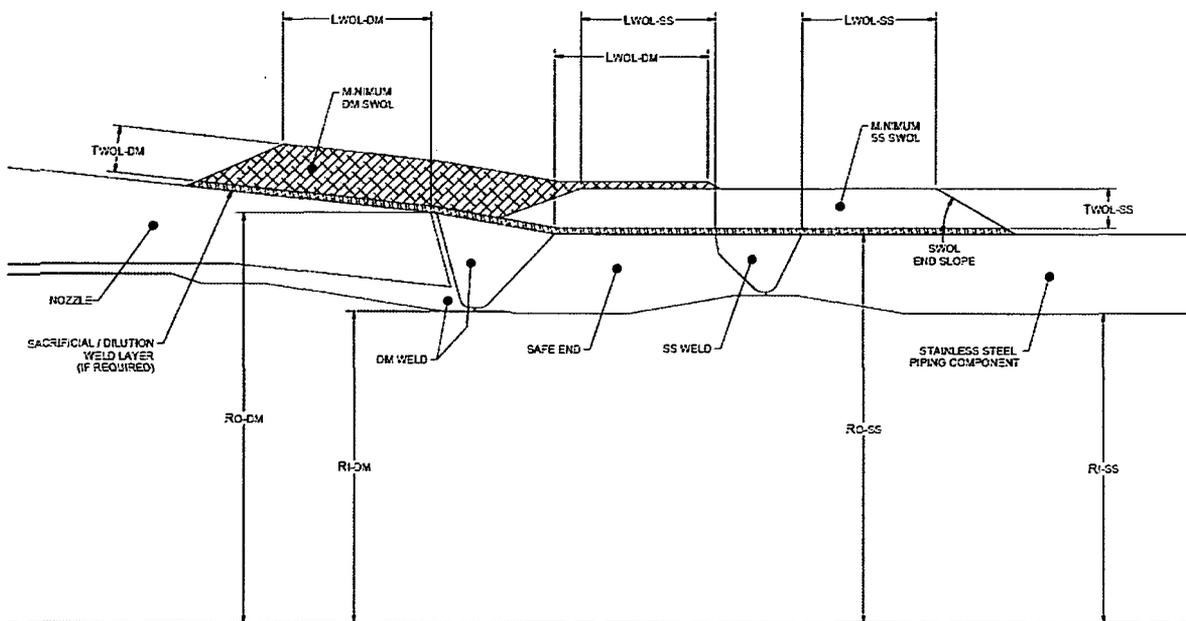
Weld Overlay Design Parameters for the Safety Injection Nozzles
